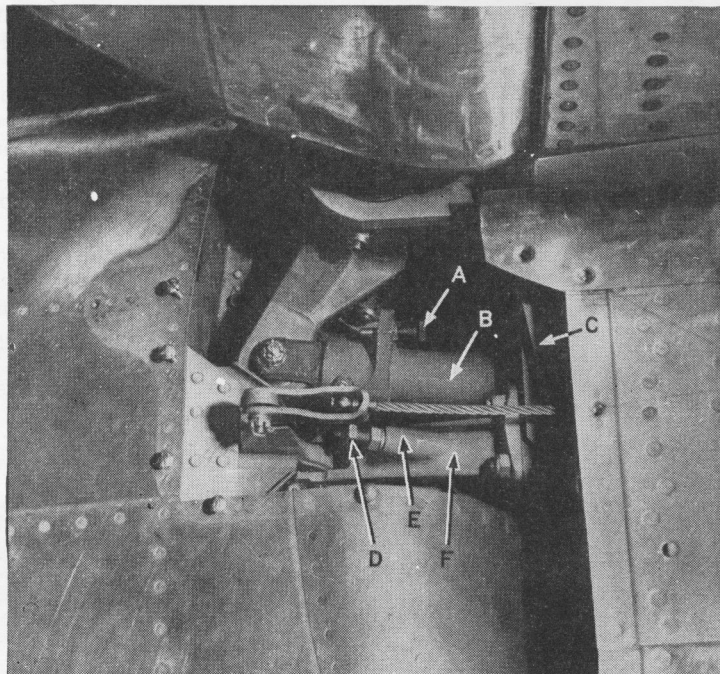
An adjustable stop nut (A) on the P-47N elevator control is set in a fitting attached to torque tube (B), the limit being determined by the distance from fitting (C). A rudder stop nut (D) is set in fitting (E) attached to the rudder hinge bracket (F).
